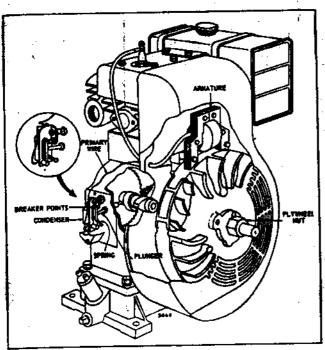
Flywheel Ignition External Breaker Models 193000, 200000, 233000, 243000, 300000, 320000
